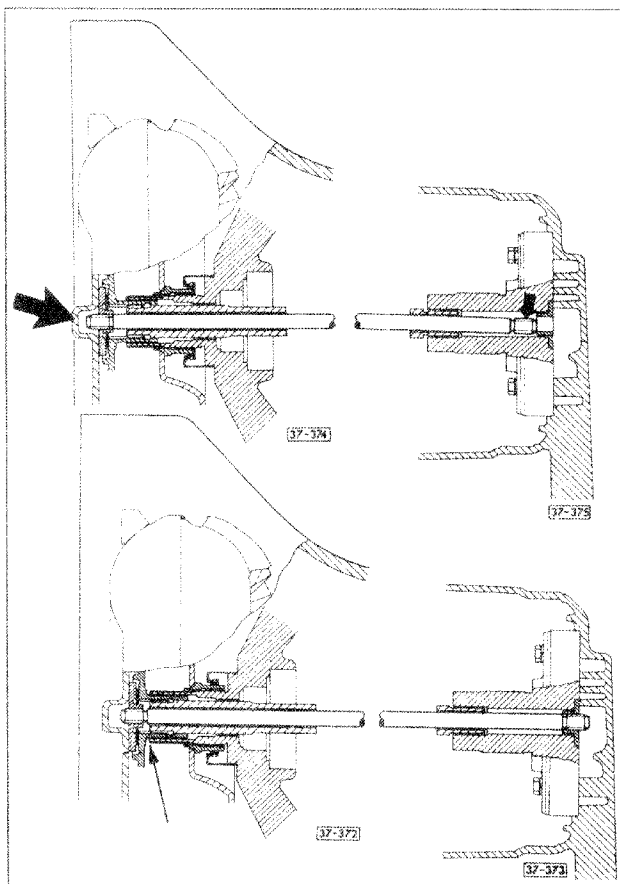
Torque converter positions. Top: converter slipped off support; pilot projects at left arrow, pump drive shaft may be disengaged, as at right arrow. Bottom: converter correctly positioned on support (arrow)
